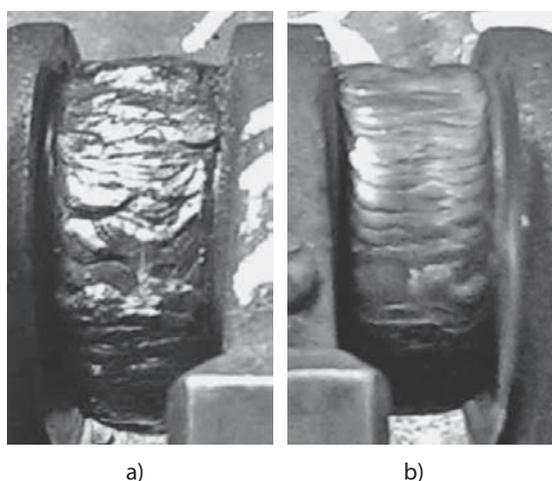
Depositing on the areas of the crankpin shaft; a – using SMAW, b – using TIG
